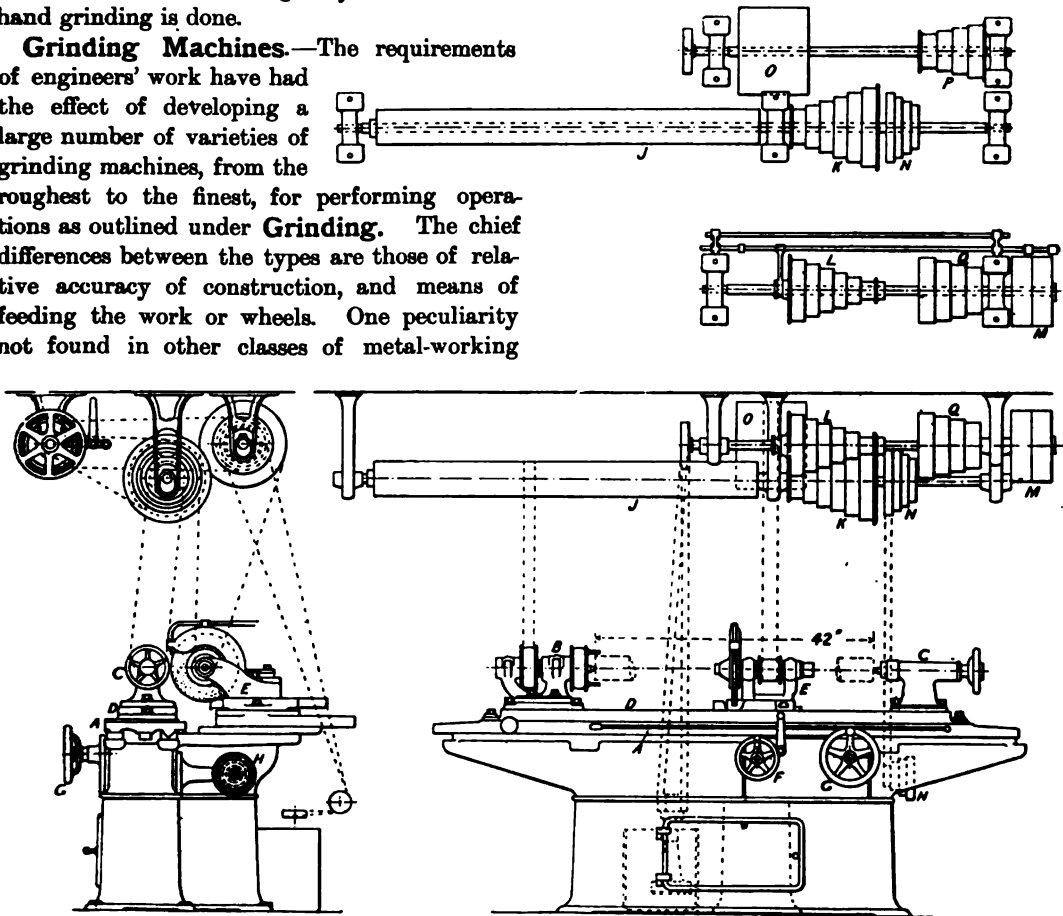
Universal Grinding Machine. (G. Birch & Co.)
